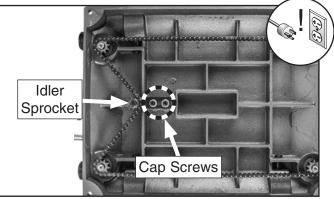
Table height chain adjustment (shown without stand for purpose of illustration).
